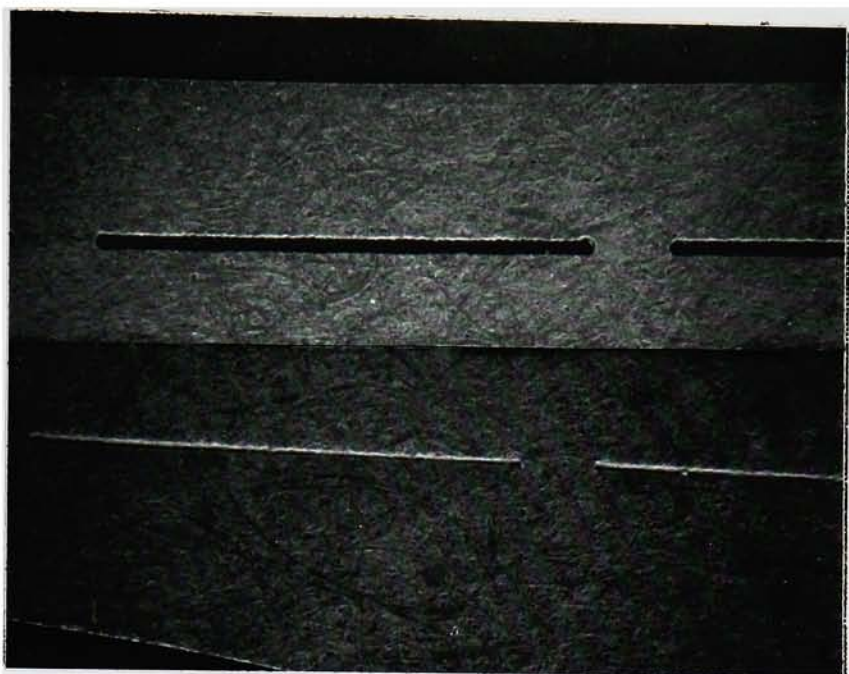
A tilted view (angle 60°) of the back side of a mechanical microperforation pattern. Enlargement: 135X
